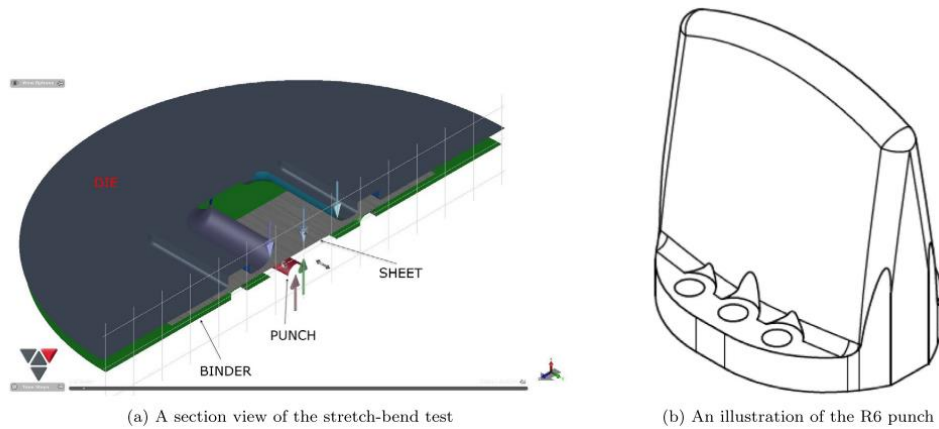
Detail of stretch-bending test setup (a) section view of binder, punch, and sheet (b) enlarged R6 punch.
